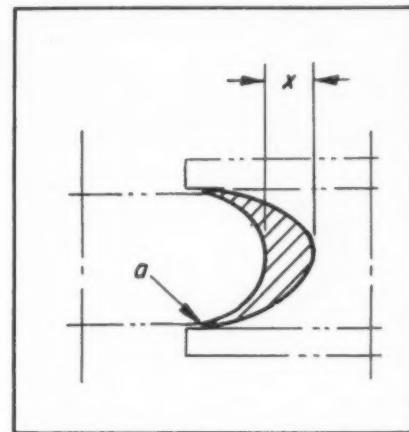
Right—Finished carriage ball race for accounting machine and cold-drawn shape used
